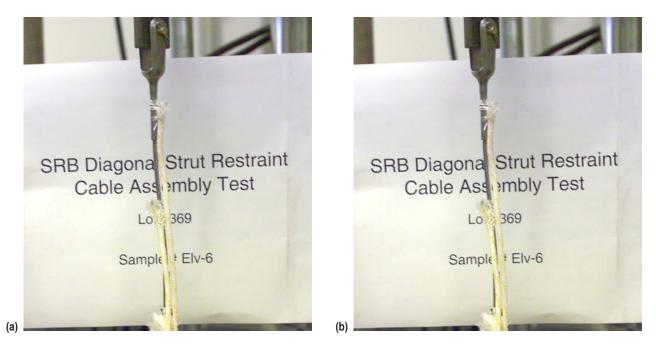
5369–ELV–6 (a) before testing and (b) after testing.
